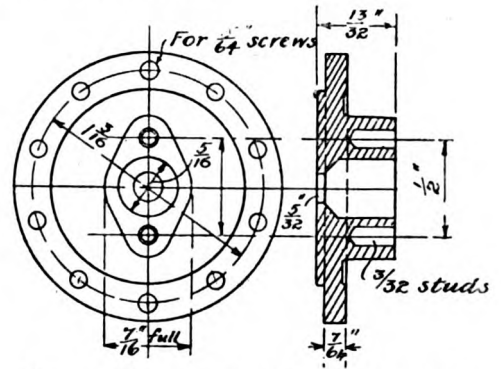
LOW-PRESSURE BACK CYLINDER COVER.
